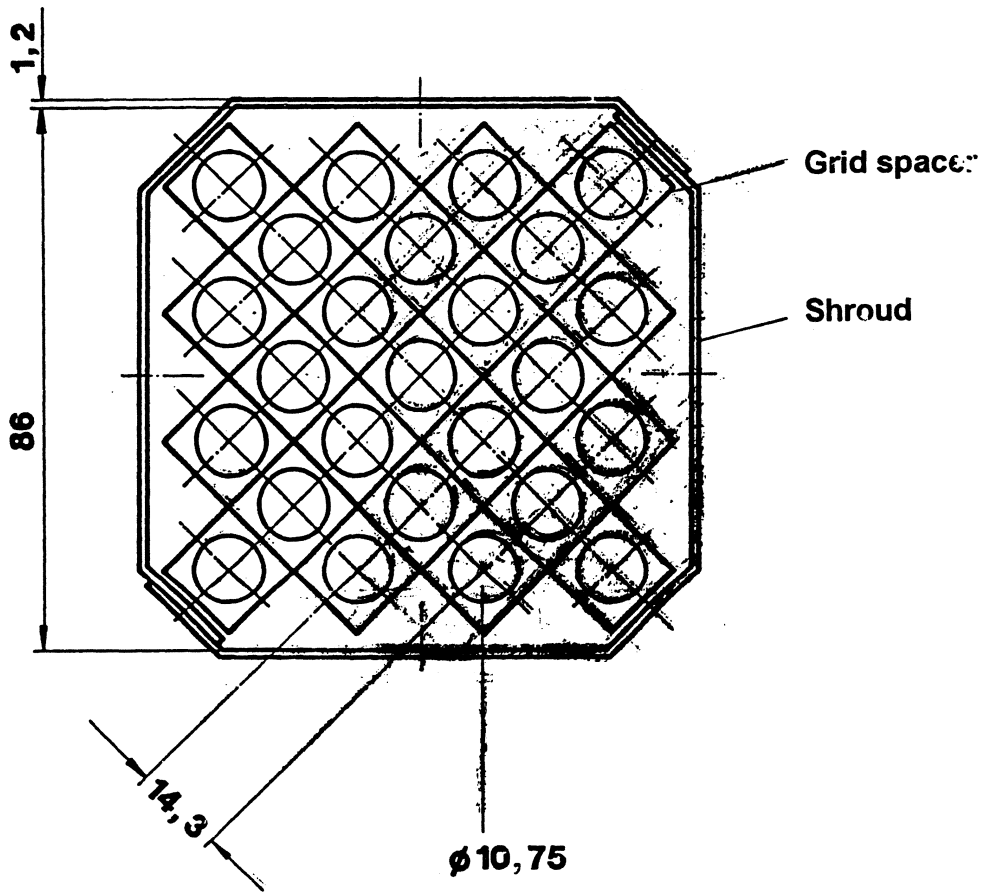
Cross section of a typical CORA PWR-type bundle with shroud and grid spacer
